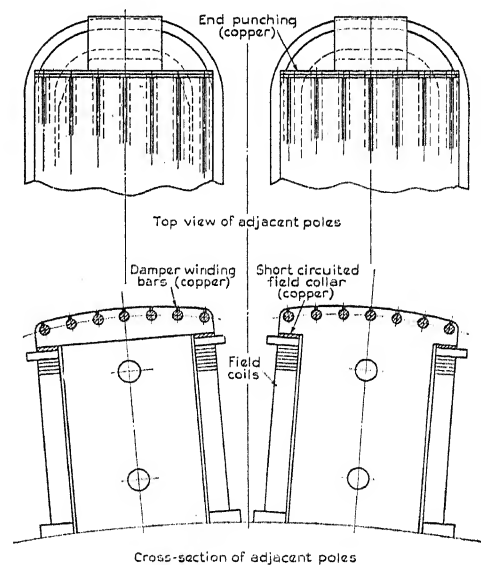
TYPE OF DAMPER WINDINGS EMPLOYED
